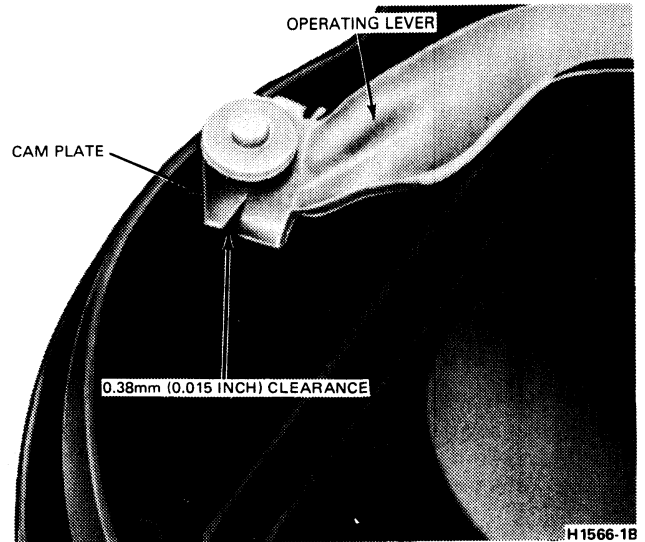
PARKING BRAKE INITIAL ADJUSTMENT
